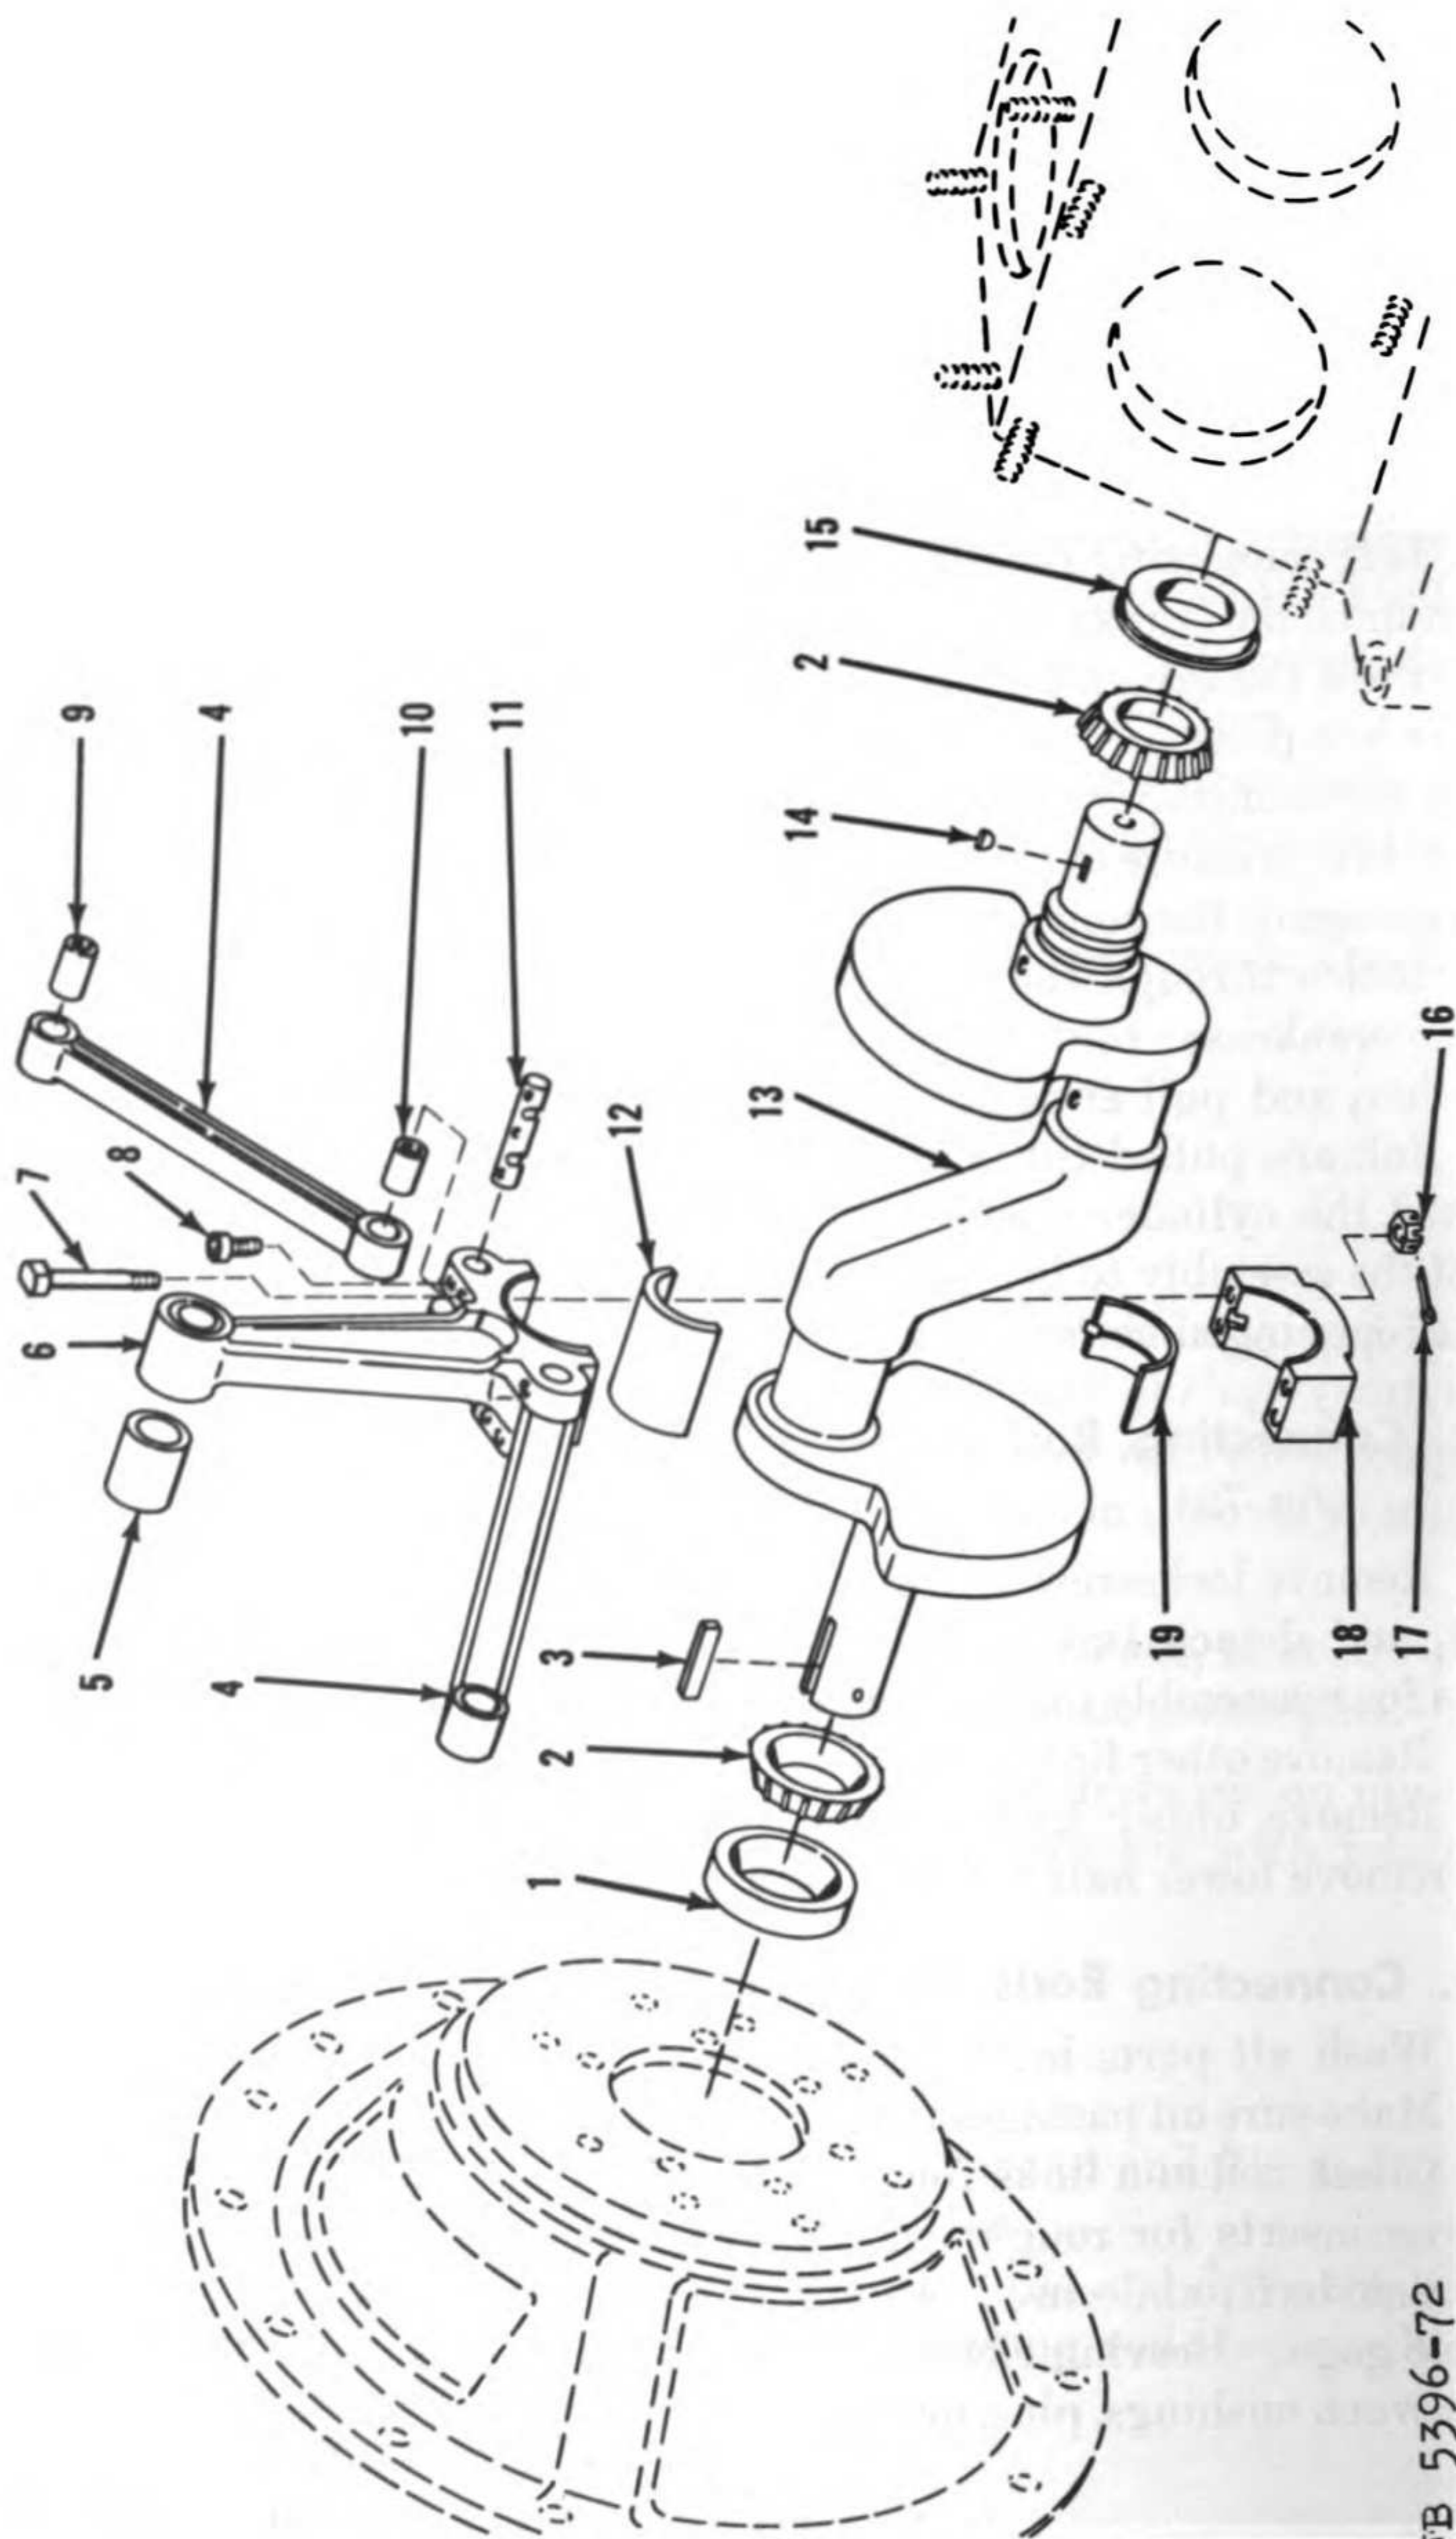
Crankshaft, connecting rod, and bearings, exploded view.
